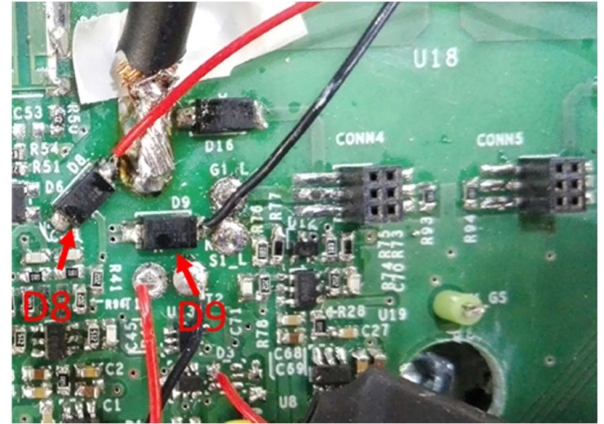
Detail of the PCB board with the two diodes in close proximity.
